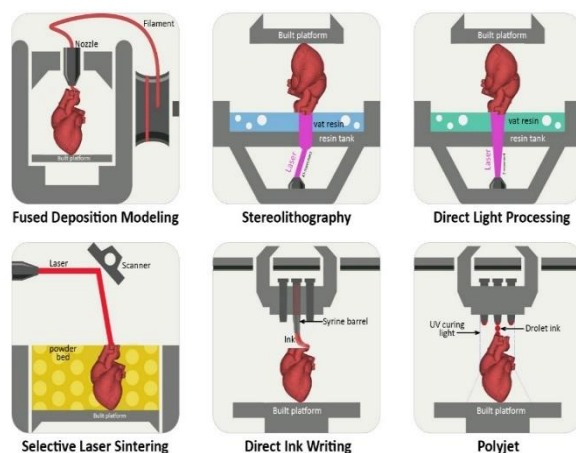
The commonly used 3D printing processes are shown schematically below: Fused Deposition Modeling (FDM), Stereolithography (SLA), Digital Light Processing (DLP), Selective Laser Sintering (SLS/SLM), Direct Ink Writing (DIW), and Material Jetting (MJ/Polyjet). [20]
